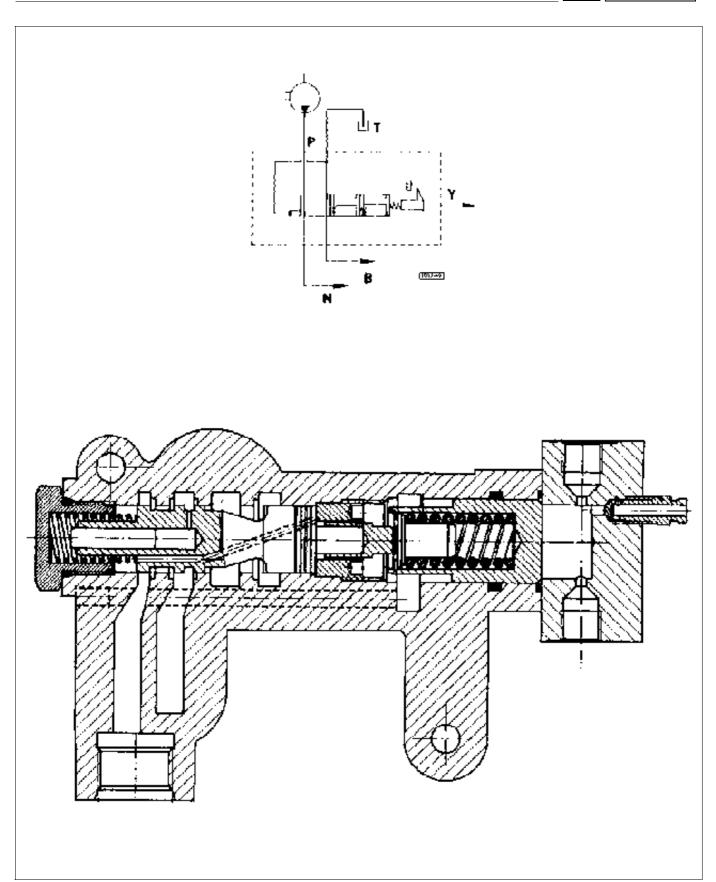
Section through trailer brake control valve, with hydraulic diagram (FRANCE version).
